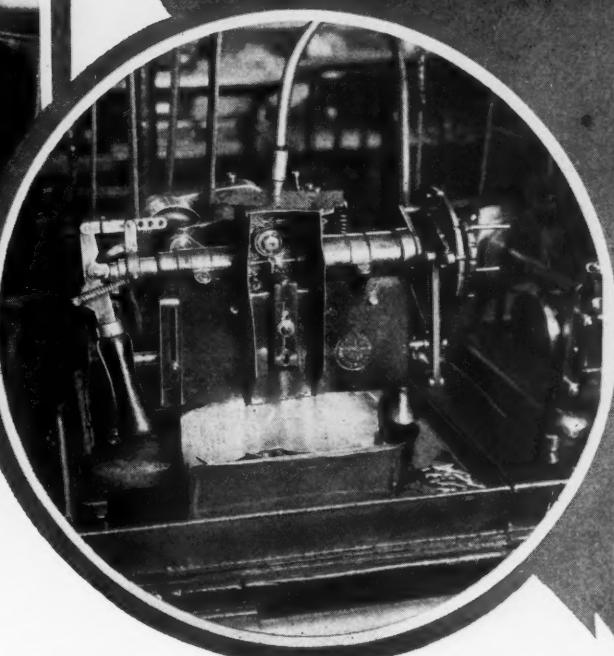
Pinion Teeth are also Milled in an Automatic Machine
